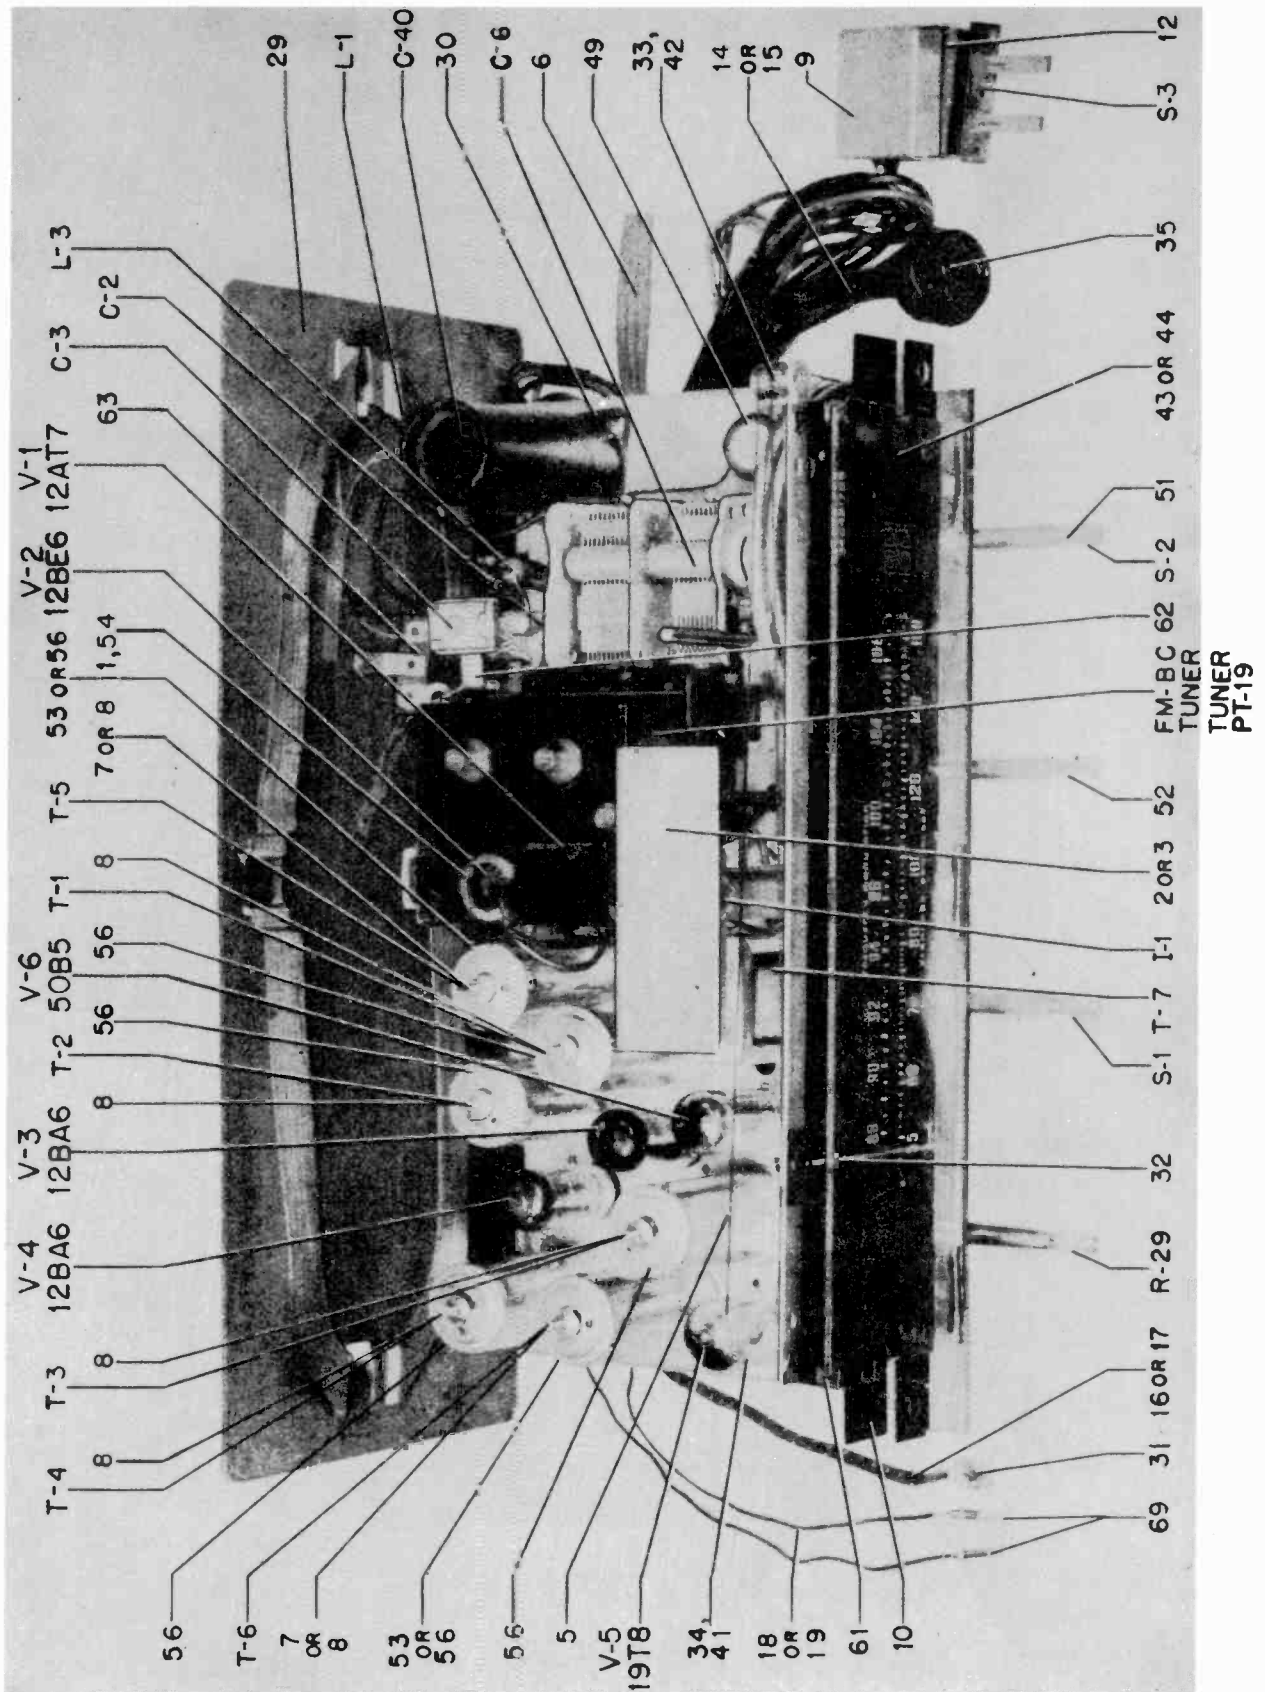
CHASSIS HS-128 & HS-132 CHASSIS PARTS LOCATION -TOP VIEW
